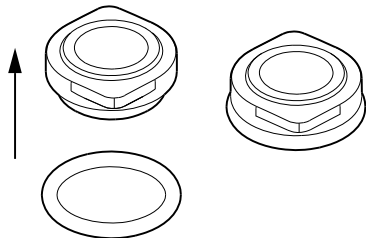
Fitting the O-ring on the stationary shaft seal part
